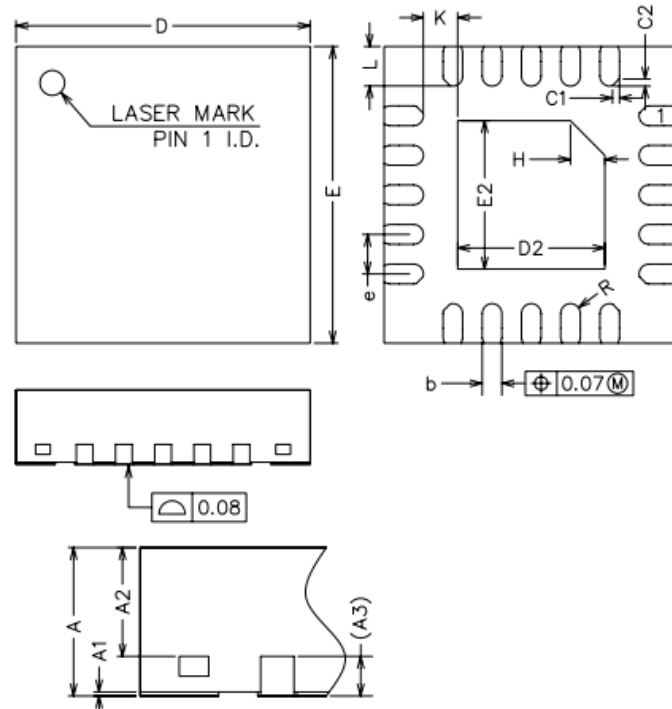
Top view, bottom view and side view of XN297L for the QFN20 3×3 package
